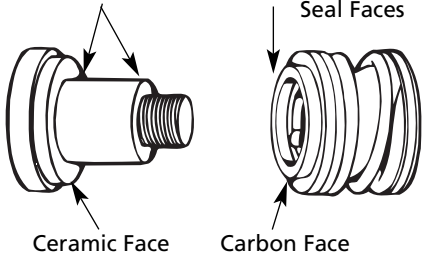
Do Not Nick Seal On Shaft Shoulder
